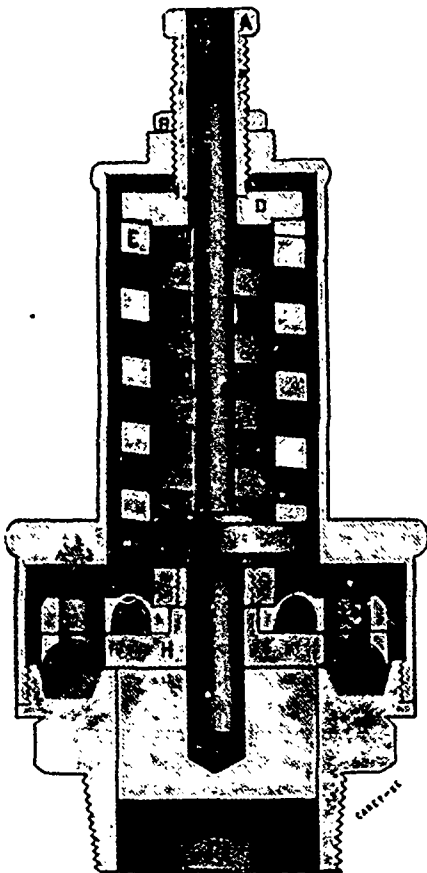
INSIDE VIEW OF LOCOMOTIVE VALVE.
